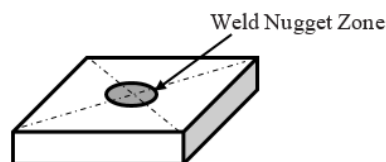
A Schematic diagram of the cross-section of spot welding joint indicating the locations examined for corrosion test.
